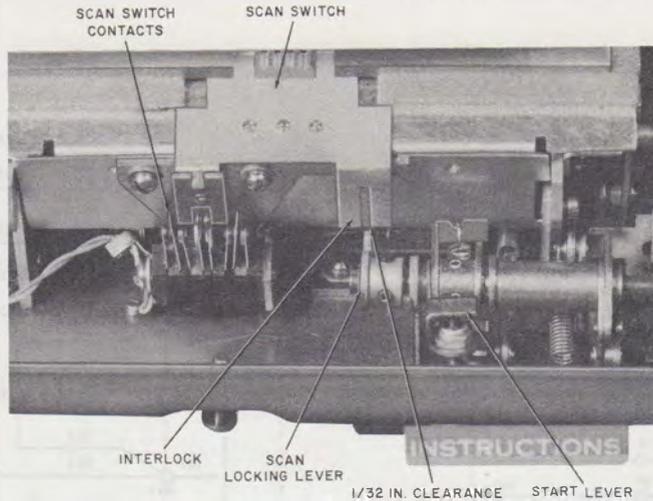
KS-16844 List 10 *Rapidial* Start Lever Mechanism
